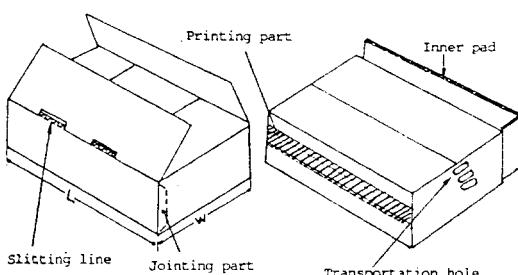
Testing conditions of single wall corrugated paperboard box.
